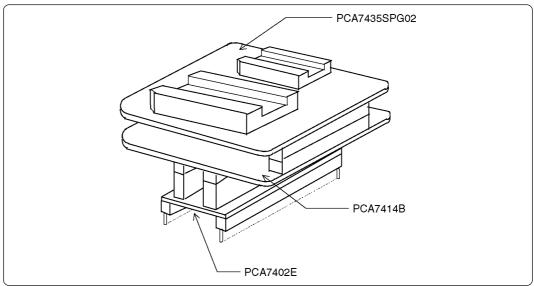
External view of the and its constituent parts (PCA7435SPG02)
